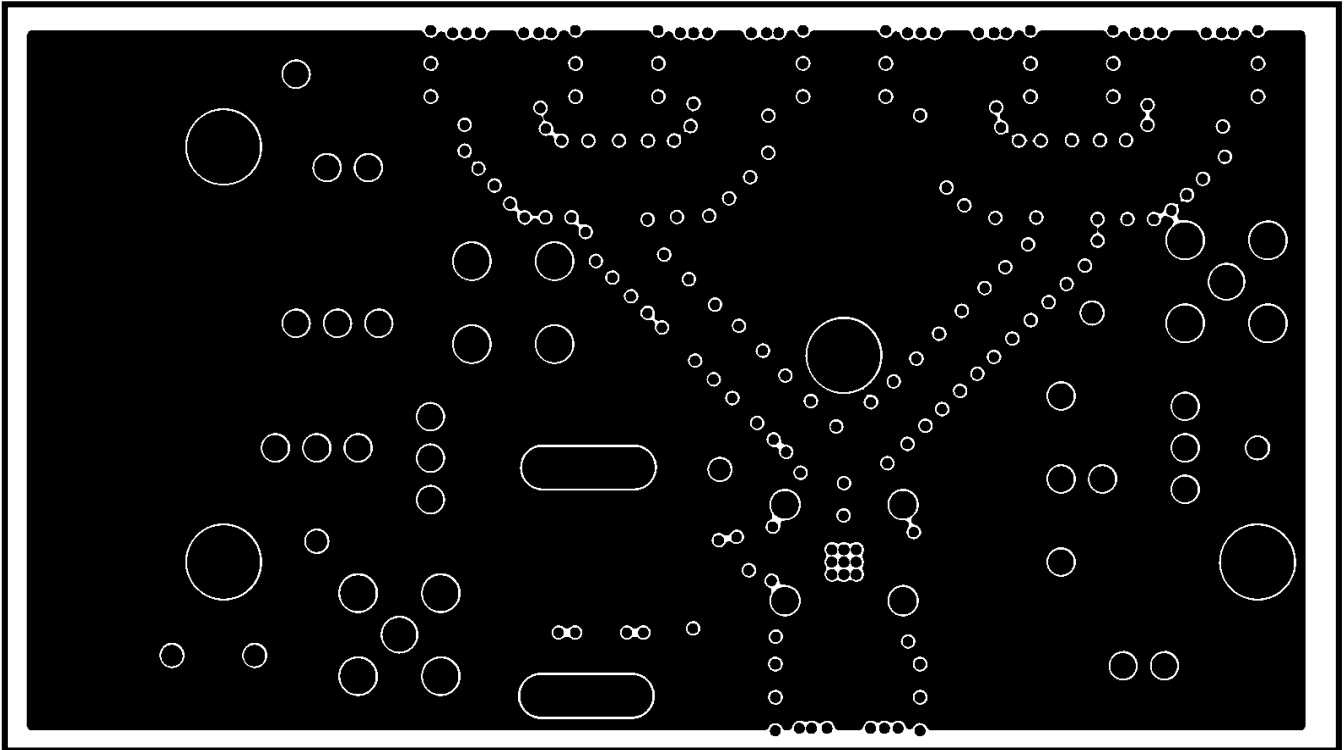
MAX3941 EV Kit PC Board Layout—Power Plane
